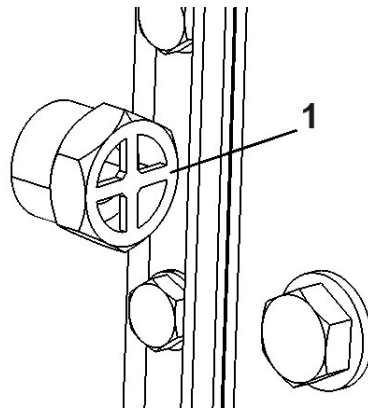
Oil level in the gear transmission: 1 – inspection plug with sight glass
